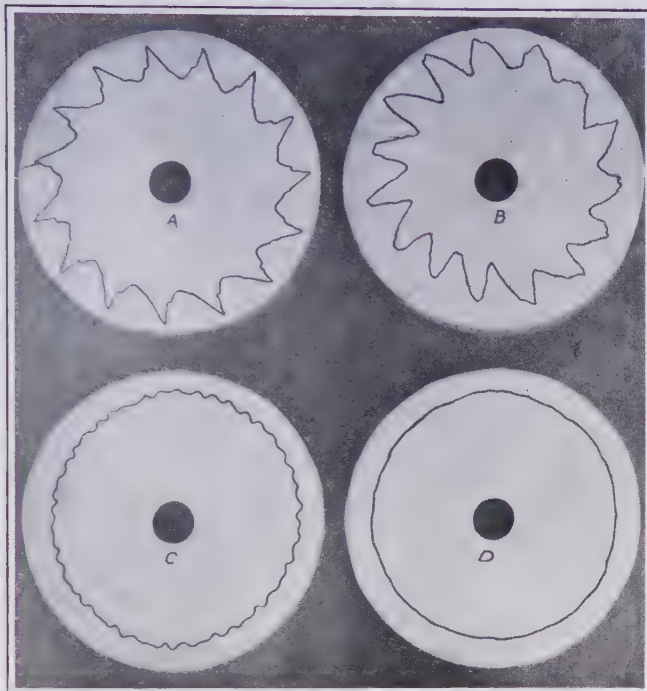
Typical charts produced on the Saurer testing machine with 15-tooth pinions.
